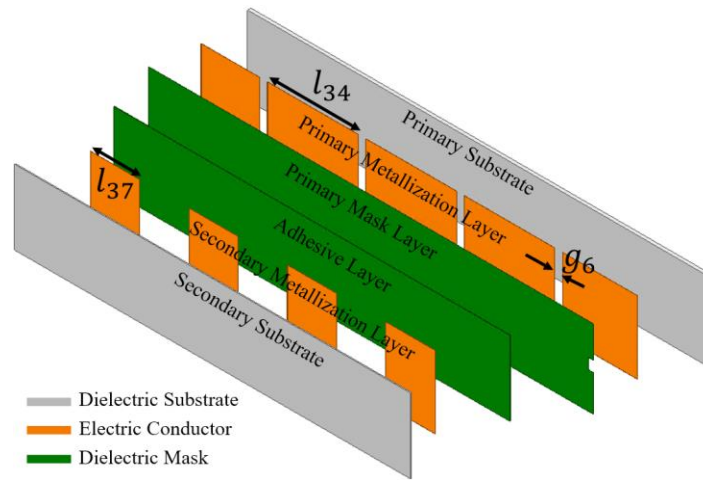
Proposed realization of series capacitance using a multilayer PCB assembly.
